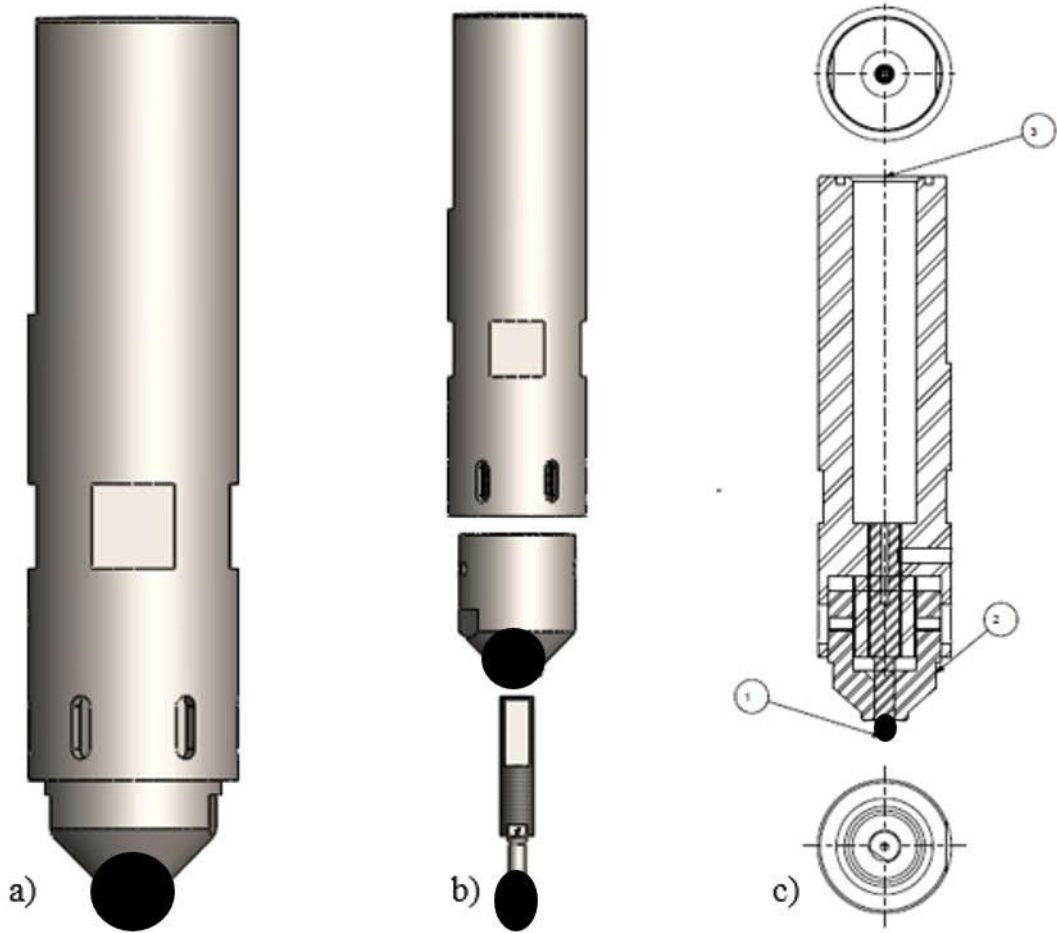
Schematic representation of the modular tool a) tool assembly; b) exploded view; c) tool assembly cross section
